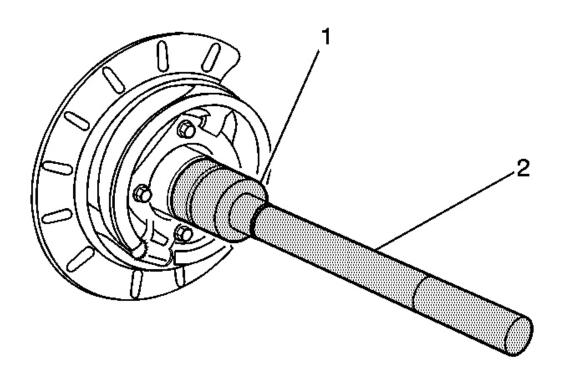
Installing Wheel Speed Sensor Ring Courtesy of GENERAL MOTORS CORP.
